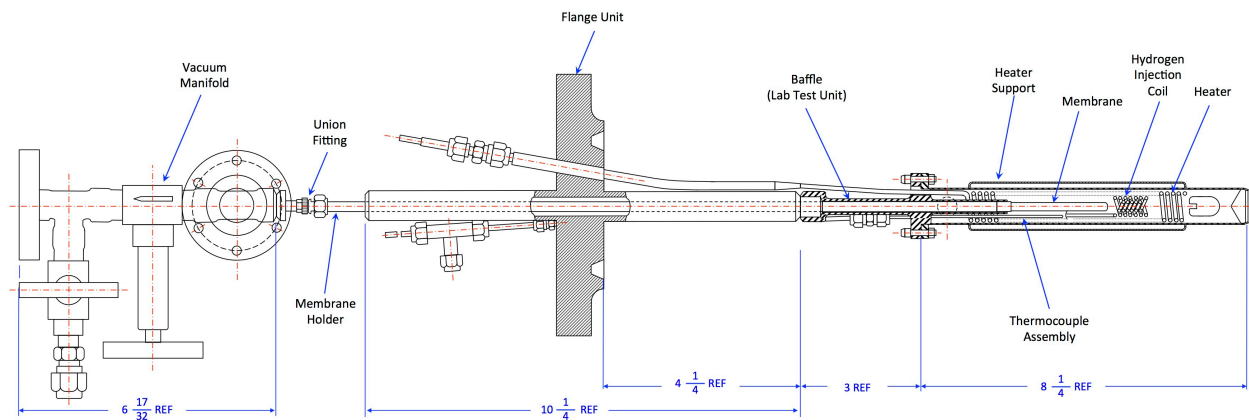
Revision of CGHM membrane assembly for laboratory test.
